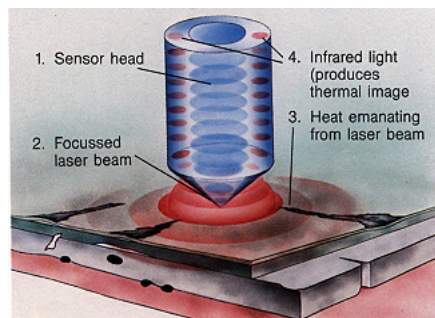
Photothermal inspection principle for detection of surface breaking cracks (Siemens 1989).
